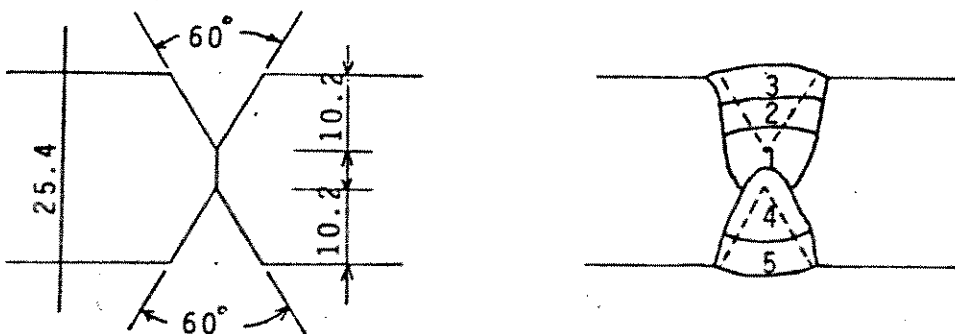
Welding Procedure for Steel 1
